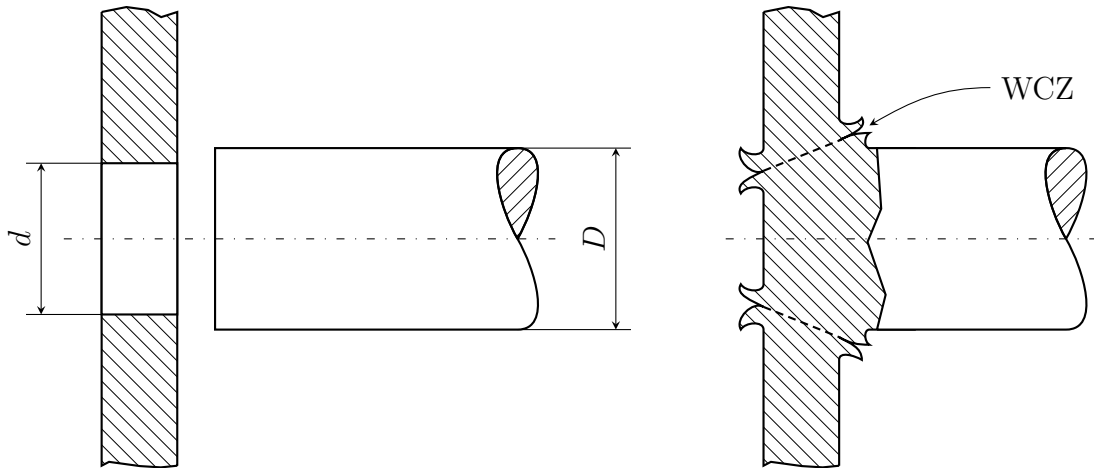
Initial and final part configuration in overlap friction welding (OFW)
